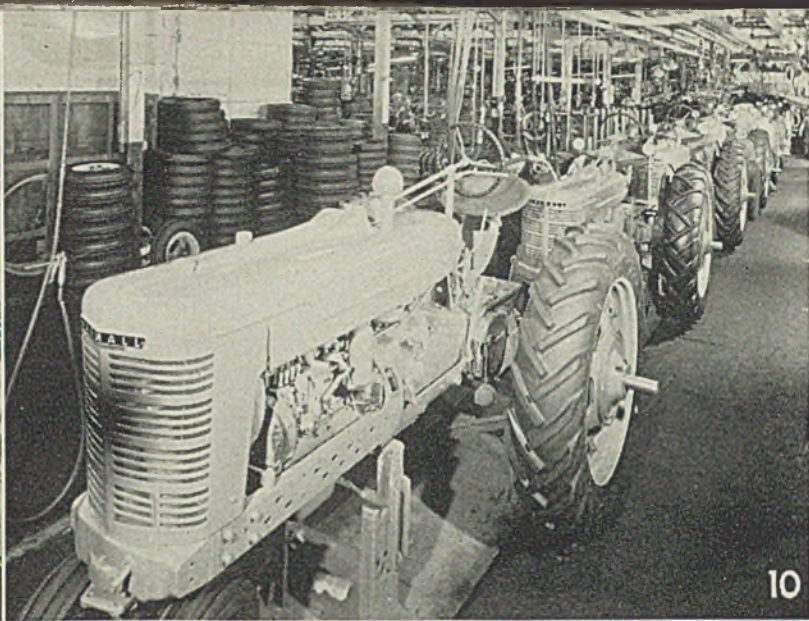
Near end of assembly line, oil and fuel tanks are filled by special measuring devices from overhead tanks shown here
